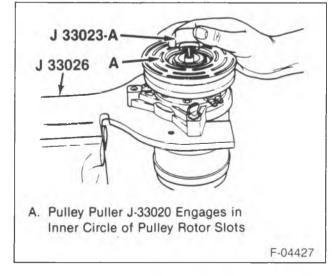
Installing the Puller Pilot and Pulley Rotor Slot Location
